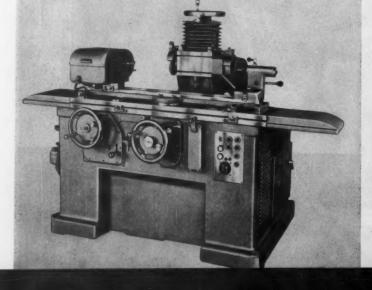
No. 32 universal and tool grinder to be shown by Covel Mfg. Co.
